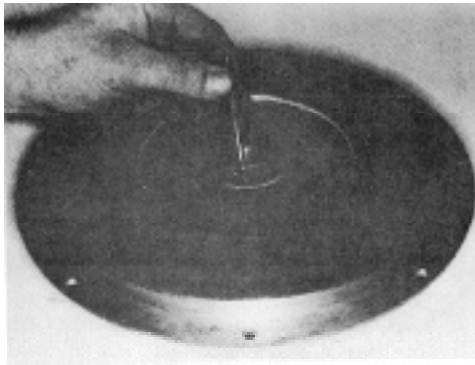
, T-524. Checking sealing ring bore in oil seal/diffuser plate
